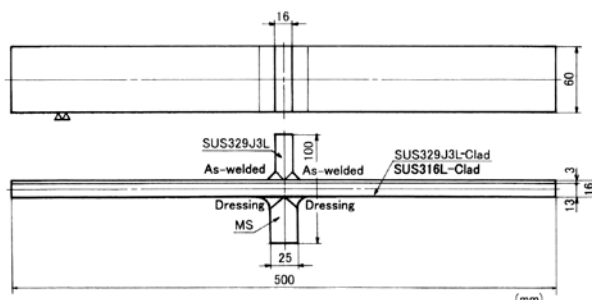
Shape and size of fatigue test specimen (Non-load-carrying full penetration cruciform welded joint)
